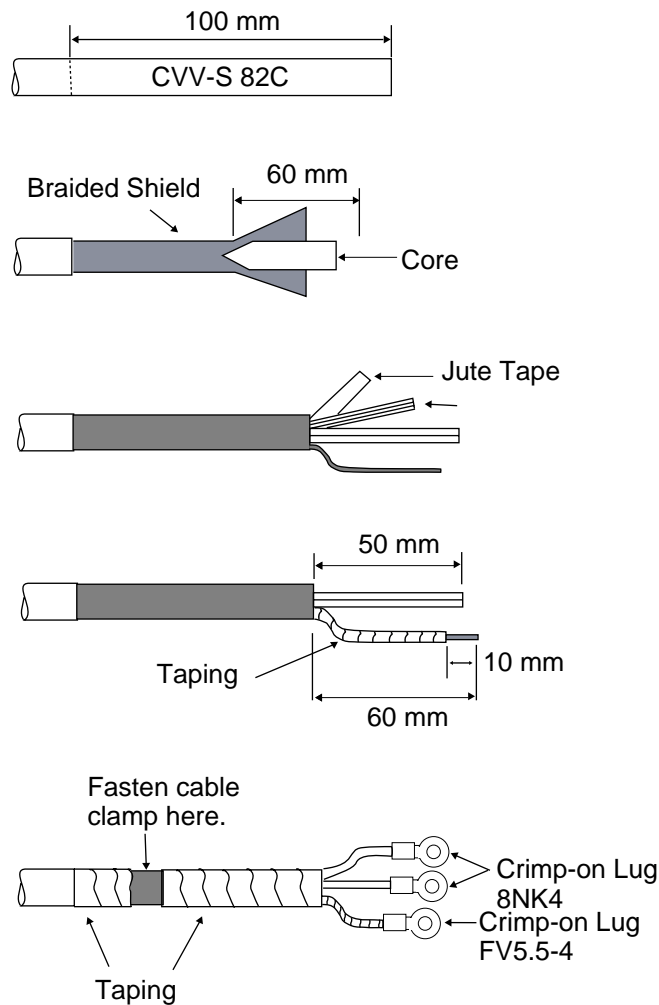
Fabricating power cable CVV-S 8 x 2C
